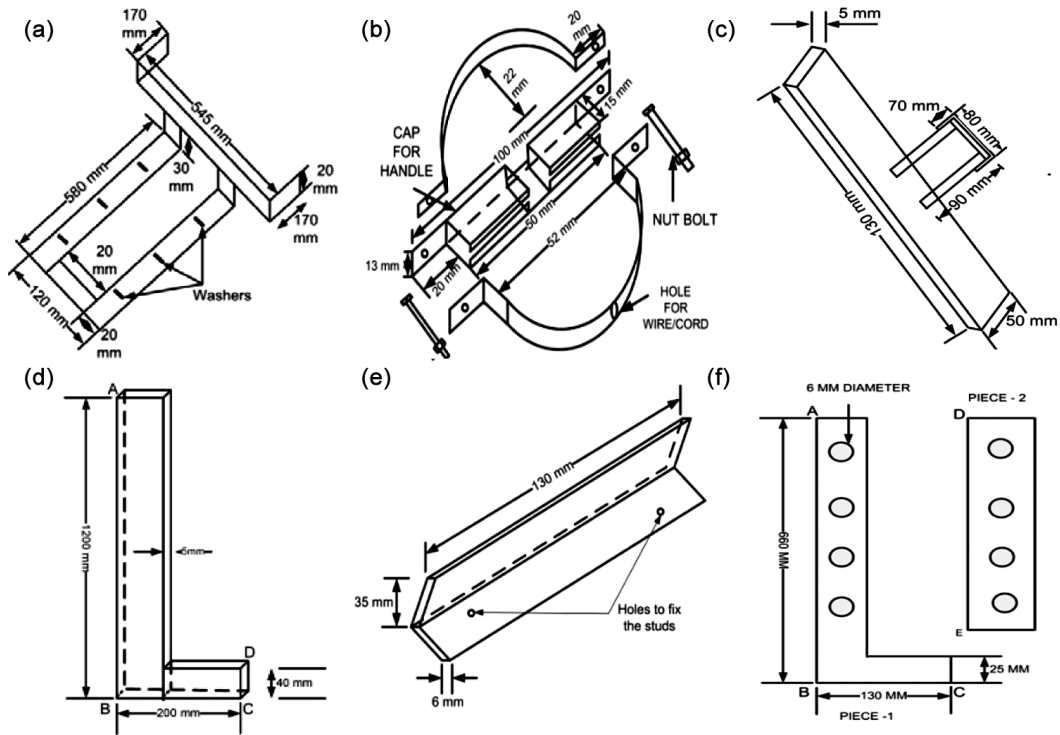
Isometric view of (a) frame to support the cotton rope, (b) attachment for the handle of tap, (c) stand for horizontal pedal, (d) L-Shape mild steel flat, (e) stand for studs, and (f) front view of L-Shape flat for adjusting the height of mechanism according to sink height.
